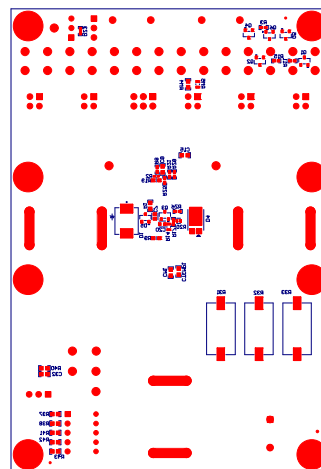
TPS25985EVM Board: Bottom Assembly
